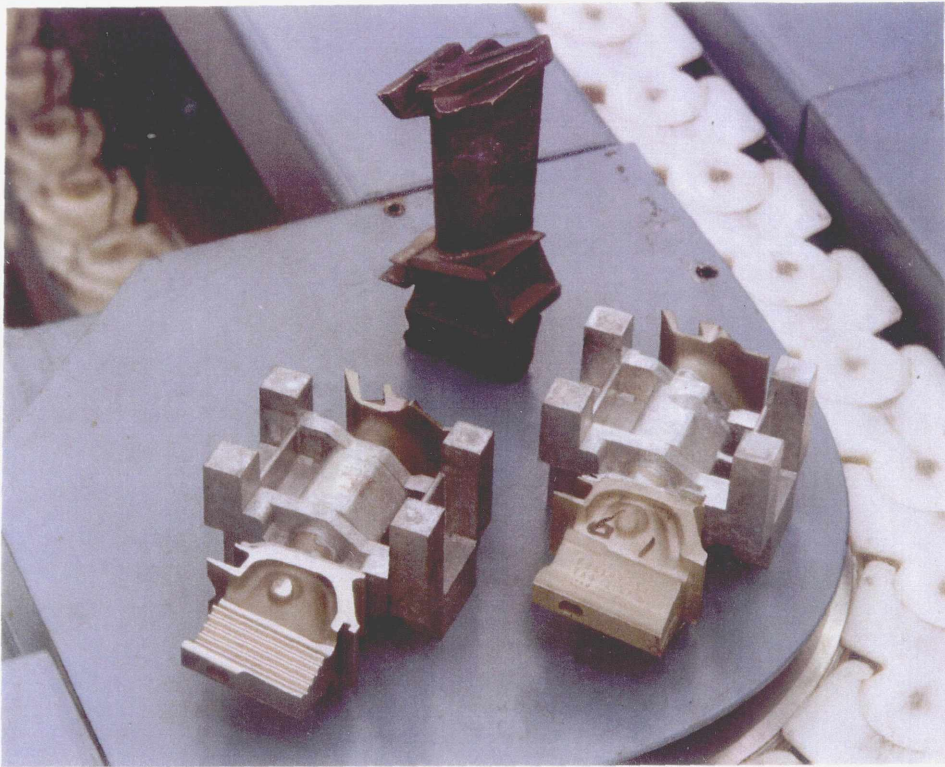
Zinc Encapsulation of Blade Castings Enables Aerofoil Aligned Root and Shroud Grinding
